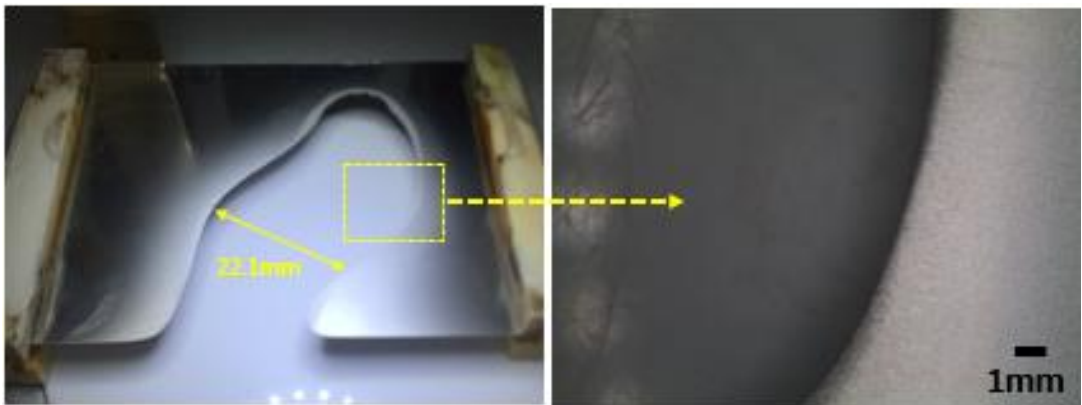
Workpiece after 2-axis ECM using Spherical electrode on STS304 0.3T
